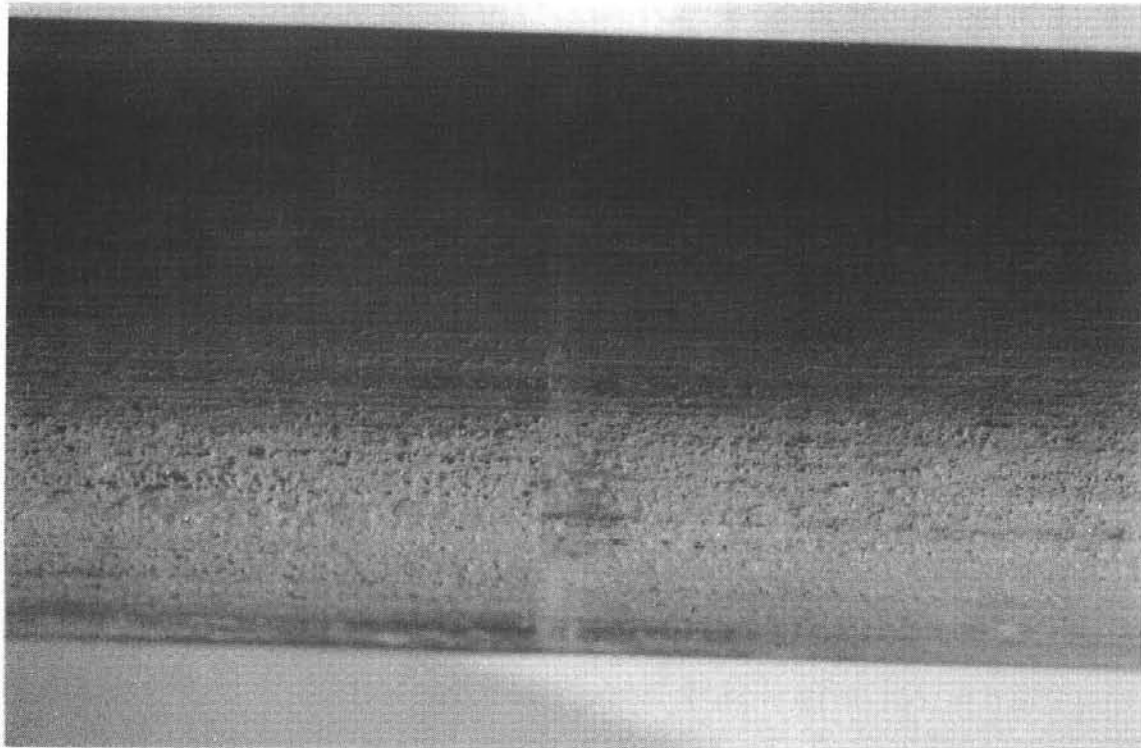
MDAC Elevation Jack Shaft after Test
